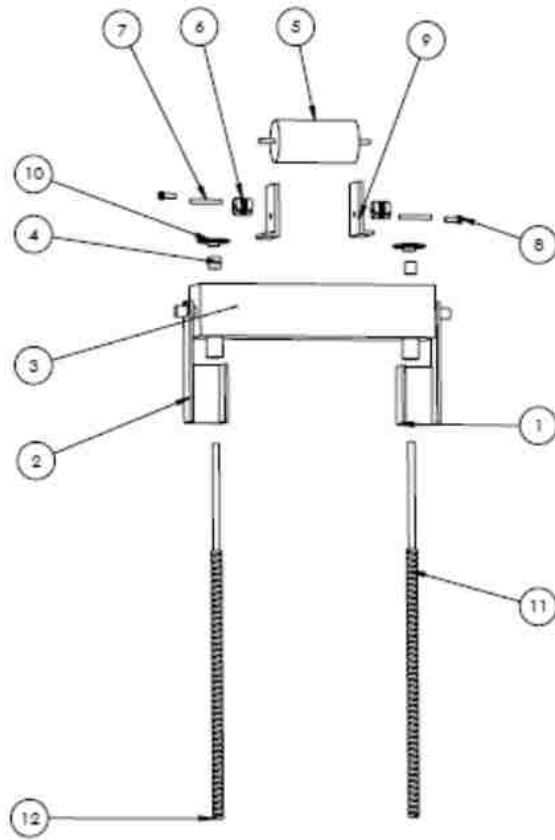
Figure Appendix A.1: clenching subsystem exploded view CAD drawing
